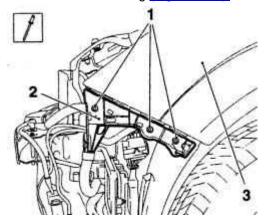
Rivets side guide front wing: 1 - rivets, 2 - side slide 3 - wing
